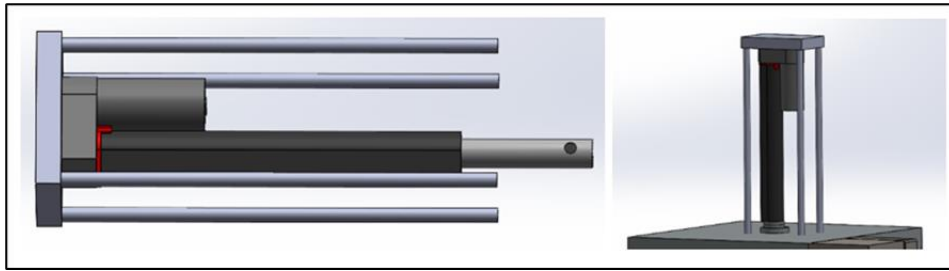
Arrangement of the Linear Actuator Unit Installed in the Machine
